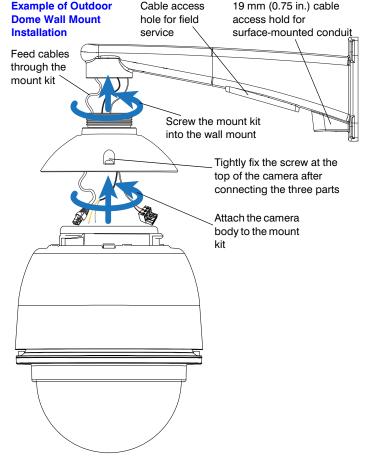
HDXWM2 Wall Mount Installation
